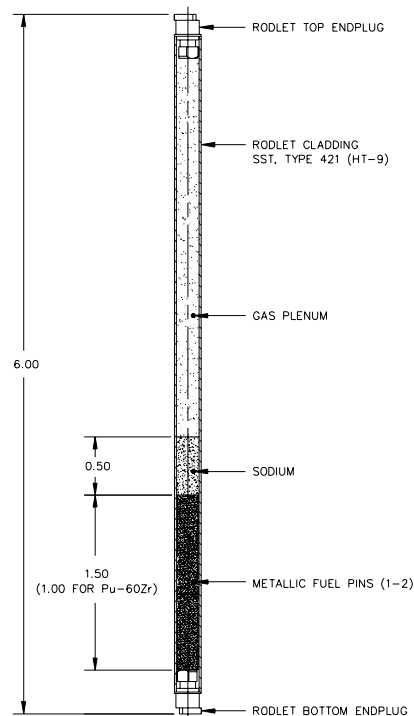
Rodlet assembly axial dimensions for the AFC-2A & B metallic fuel tests.
